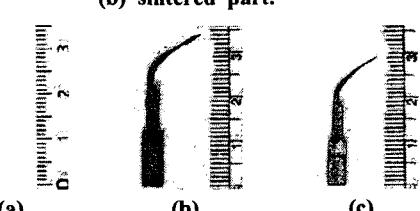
Photo of injection molded dental scaler tip with (a) LDPE, (b) PIM feedstock and (c) that of after sintering.
